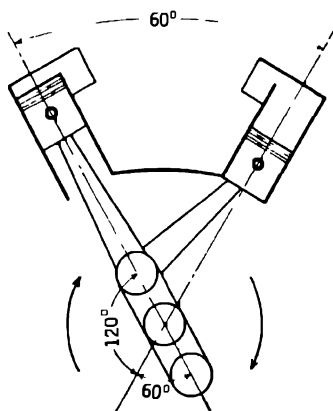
Eight-cylinder V-type Engine with Cylinder Blocks Set 60 Degrees Apart Resulting in Power Impulses Occurring at Intervals of 60, 120, 60, 120, etc.
